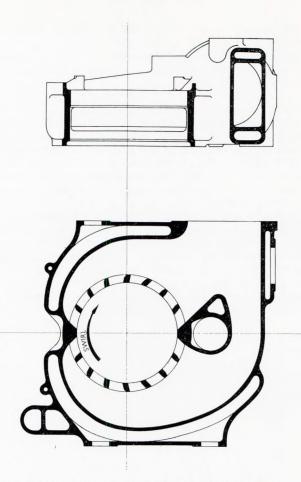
(b)—Exhaust Belt Design in 58JS3 Engines
